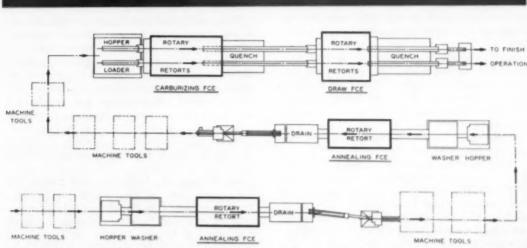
Typical layout showing rotating retorts capable of tumbling work during heat treatment and conveying parts between furnaces.
